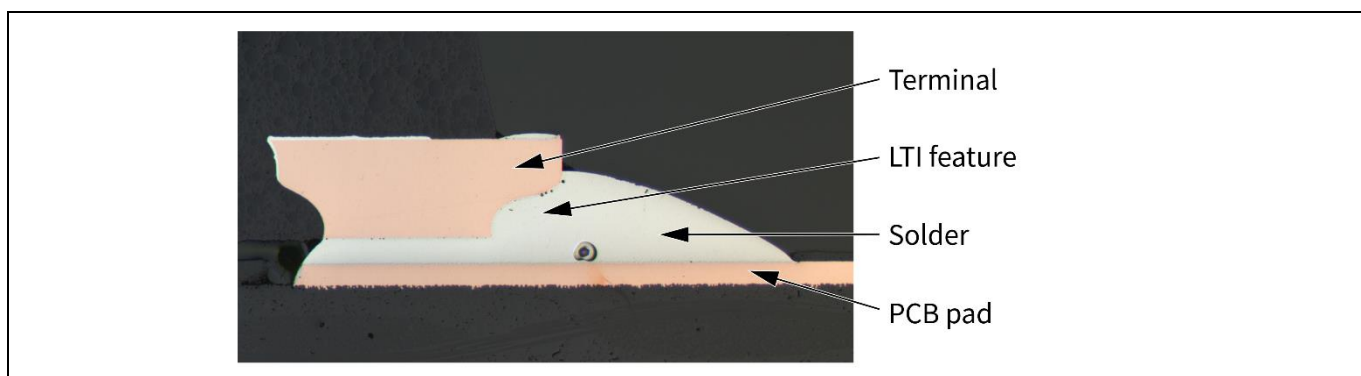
Cross section of a QFN component with "dimple" LTI terminal.
